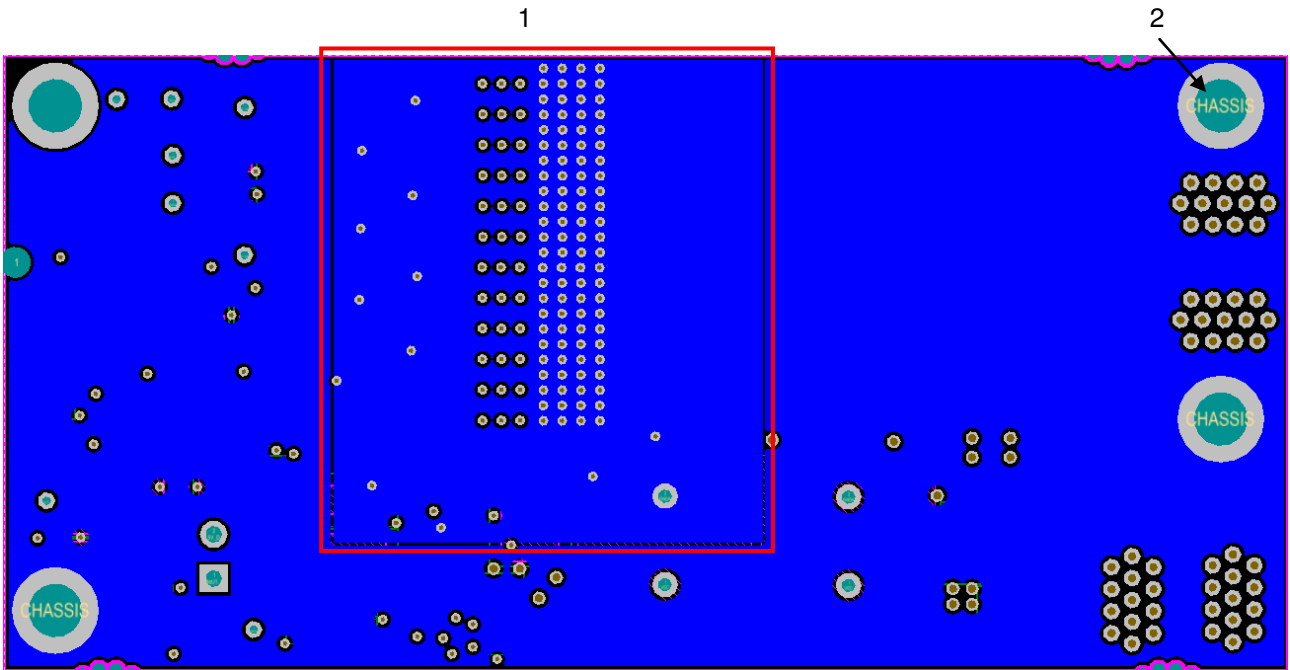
Bottom layer suggestions for the AM-SMT-24-01 PCB layout
